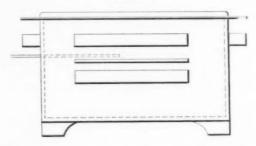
Diagram showing Location of Test Pieces in Carbonizing Pot
